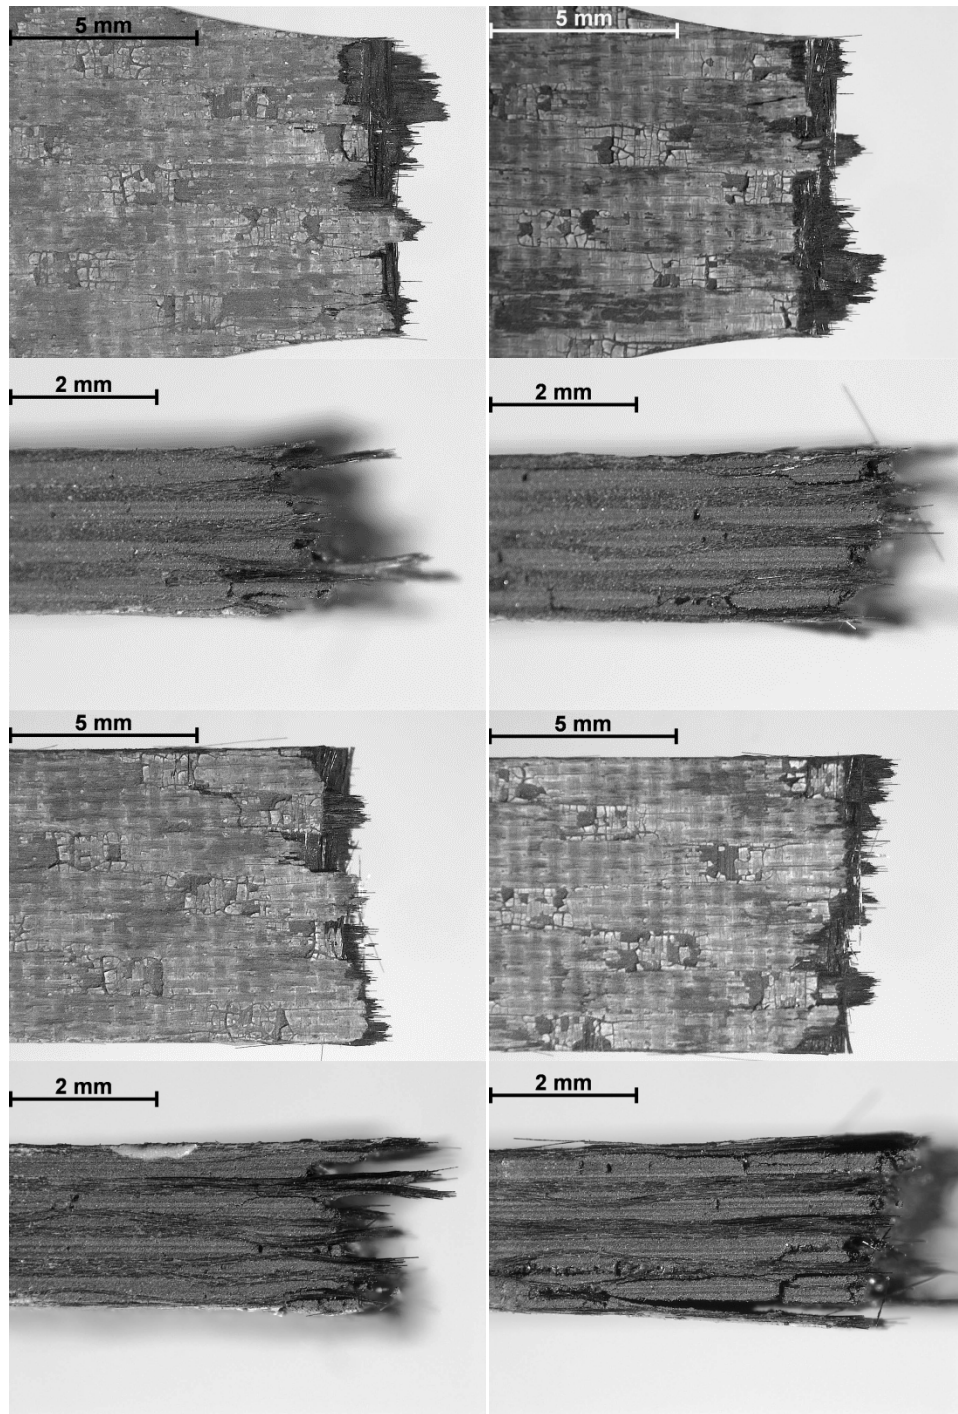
Fracture surfaces obtained in tensile test of Hi-Nicalon™/SiNC specimen subjected to prior heat treatment of 100 h at 1300°C (Plate 11105, Specimen 6)
